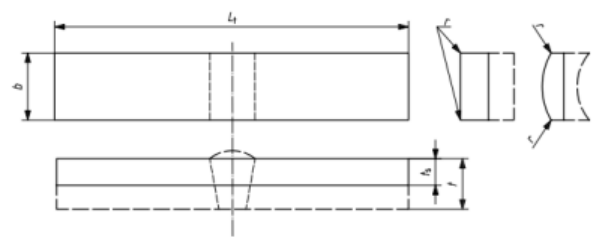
Transverse face bend test specimen for a butt weld [10]
